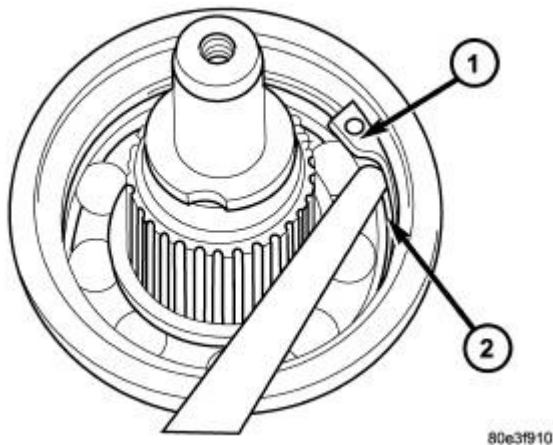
Remove/Install Rear Output Shaft Retaining Ring
